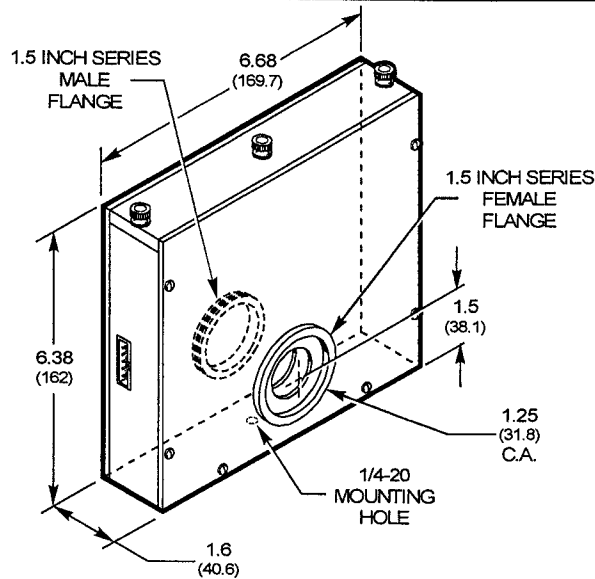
Dimensional diagram of 74041 Filter Wheel Head.
